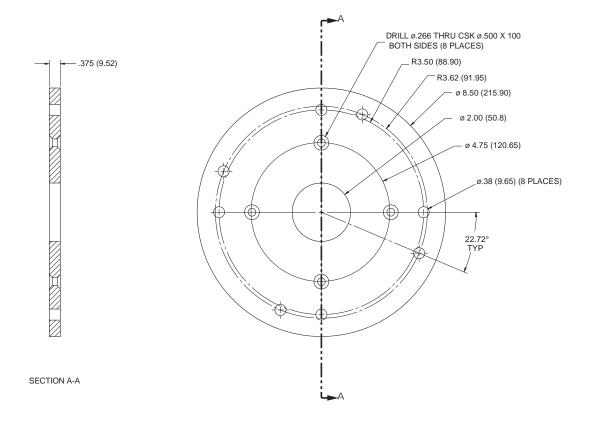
Dimensions, Large Base (LPED). Dimensions in inches (mm) (CohuHD p/n 8481908-001)
